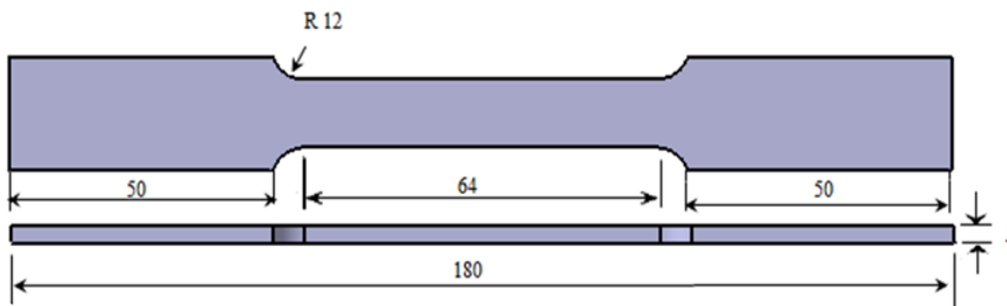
Tensile specimen drawing (All dimensions are in mm)
